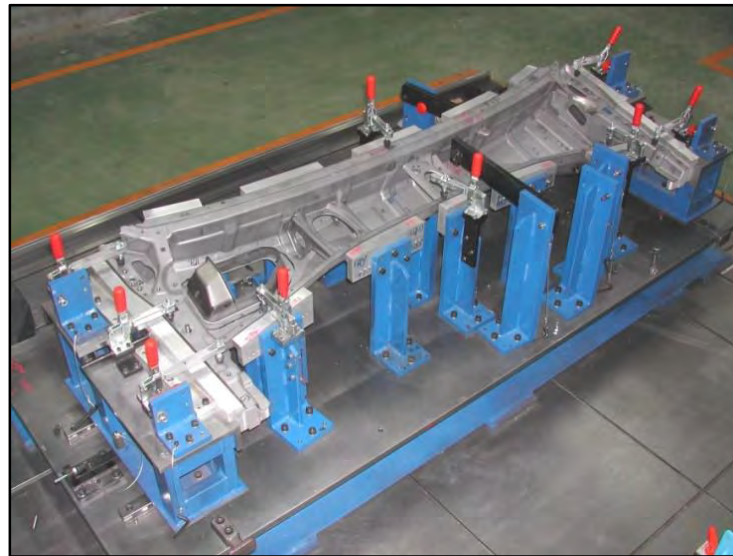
Example of checking fixture (DongGuan FongYi Precision Tooling Co., Ltd, 2011).
